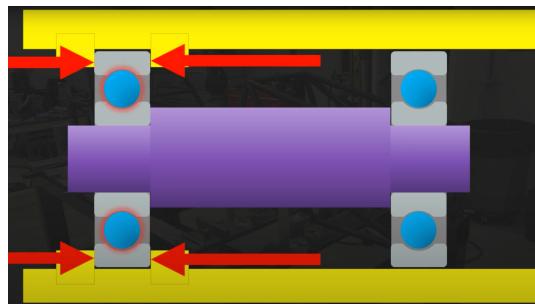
Mounting the bearings of a differential by clamping the inner and outer race of a single bearing [20]
